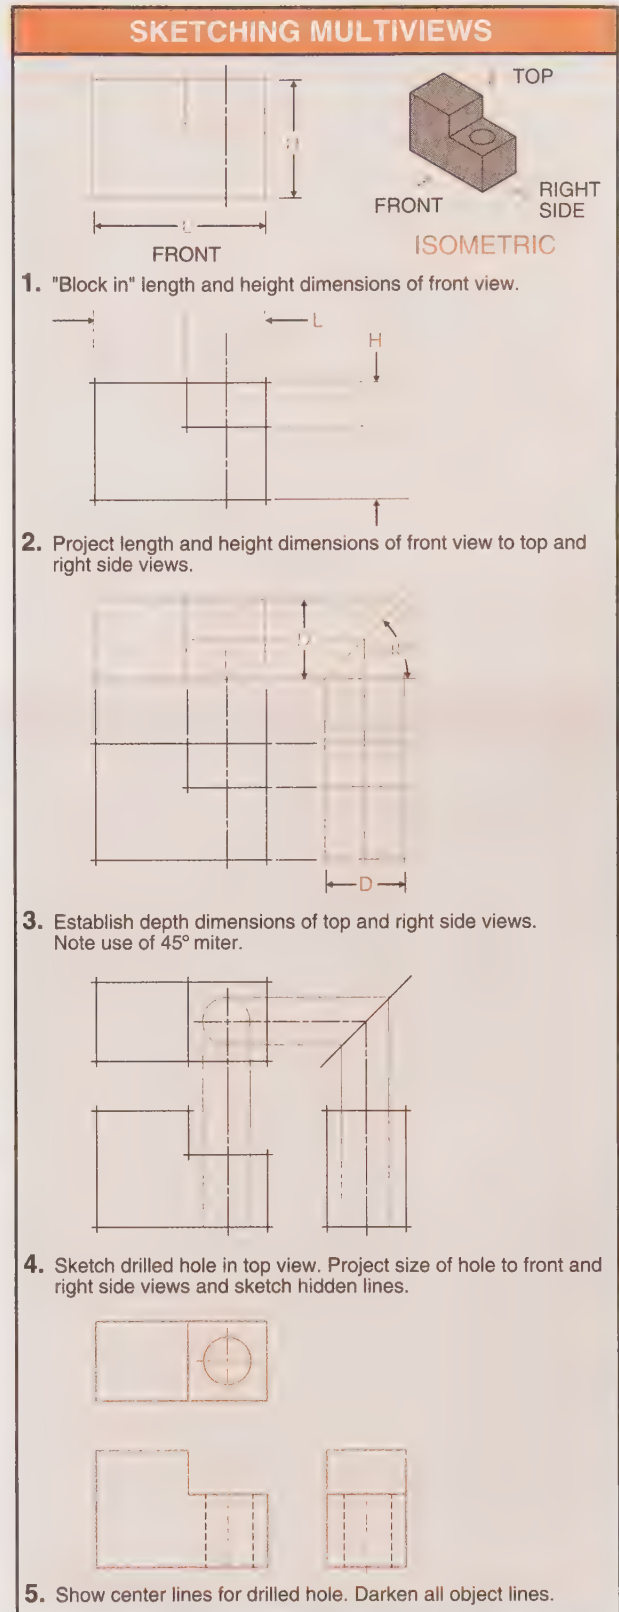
Dimensions of views in a multiview are projected from adjacent views.
